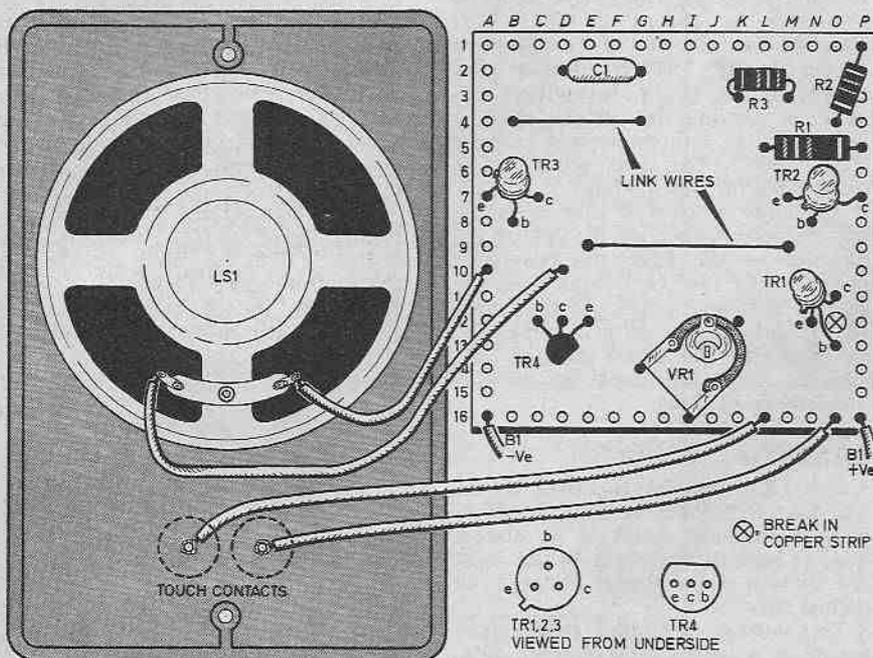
Complete wiring details for the unit. There is only one break to be made, and is at O12. Resistor R3 is a vertically mounted component.
